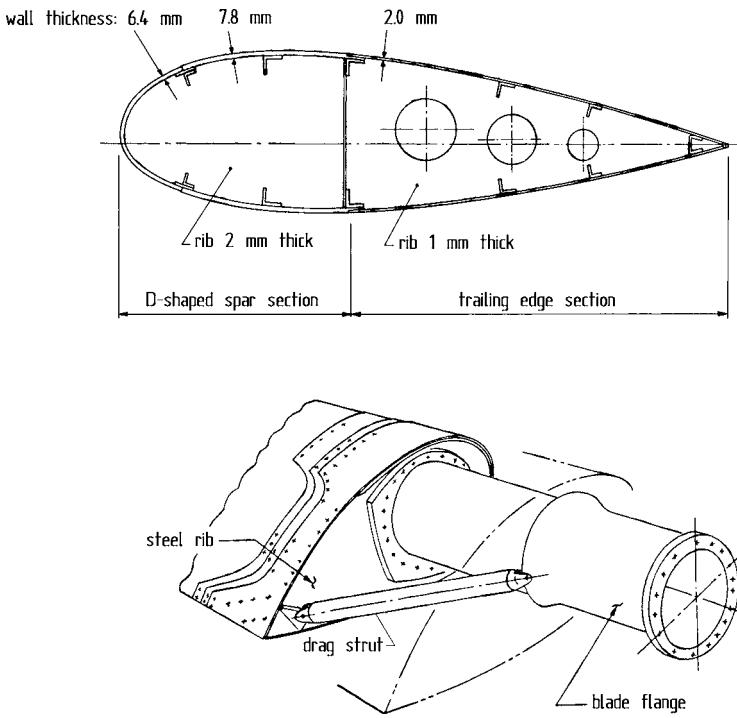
Rotor blade design with riveted duraluminium in the American MOD-o test turbine [1]
